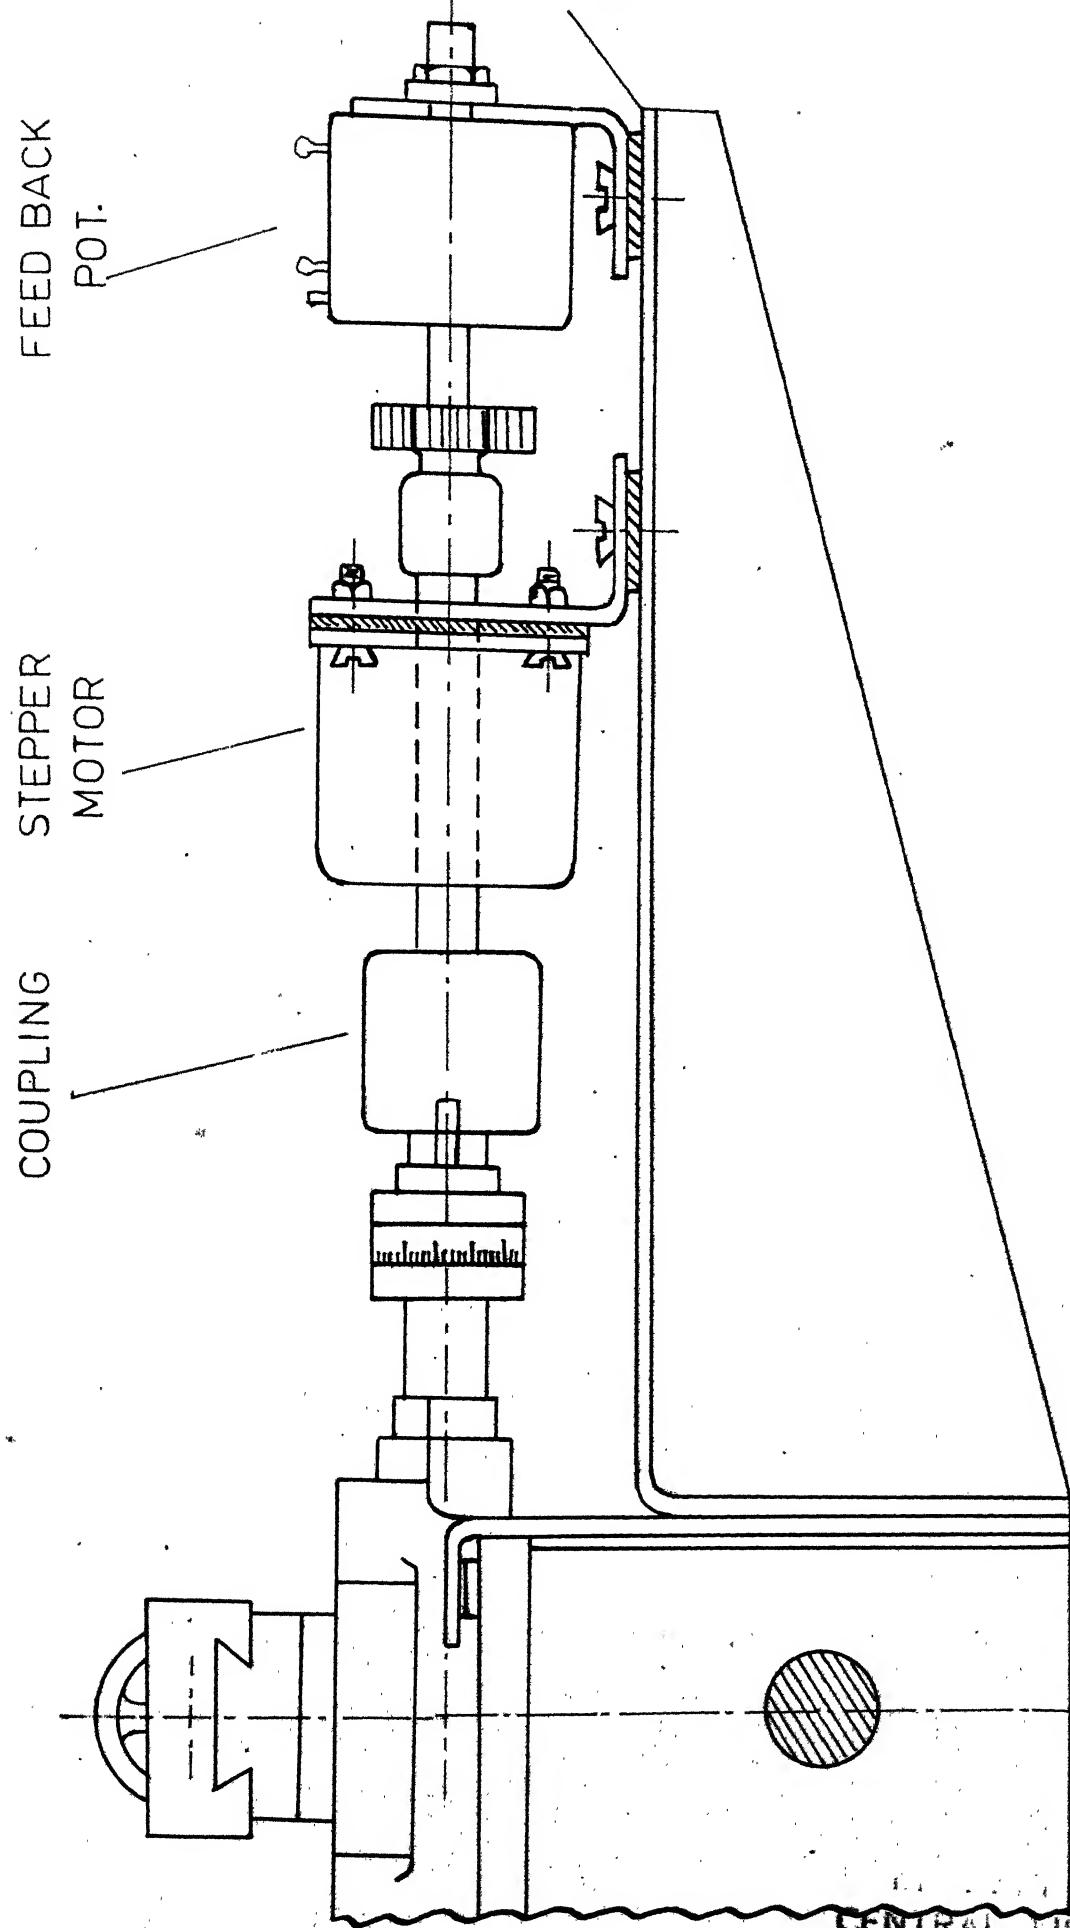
CROSS SLIDE DRIVE ASSEMBLY
